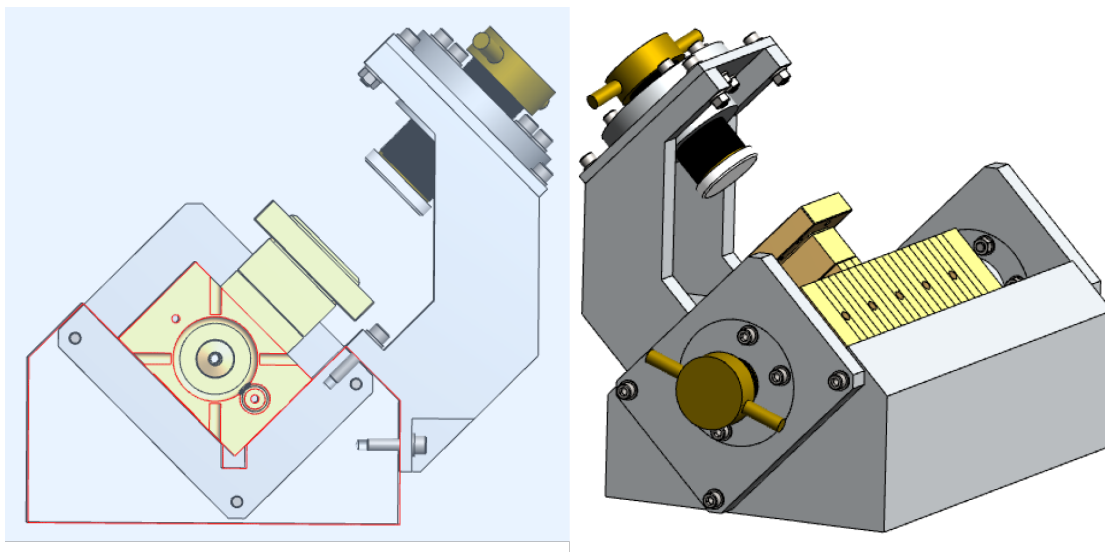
Tooling to clamp the machined disks together to do an initial RF measurement before bonding. (image courtesy of Lancaster University)
